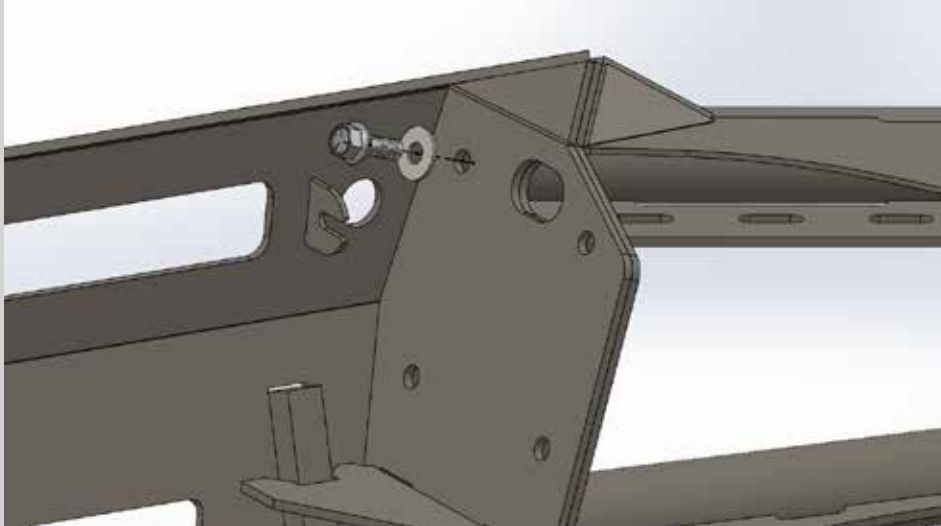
Start the $\frac{3}{8}$ " flange bolt in the upper front corner.
